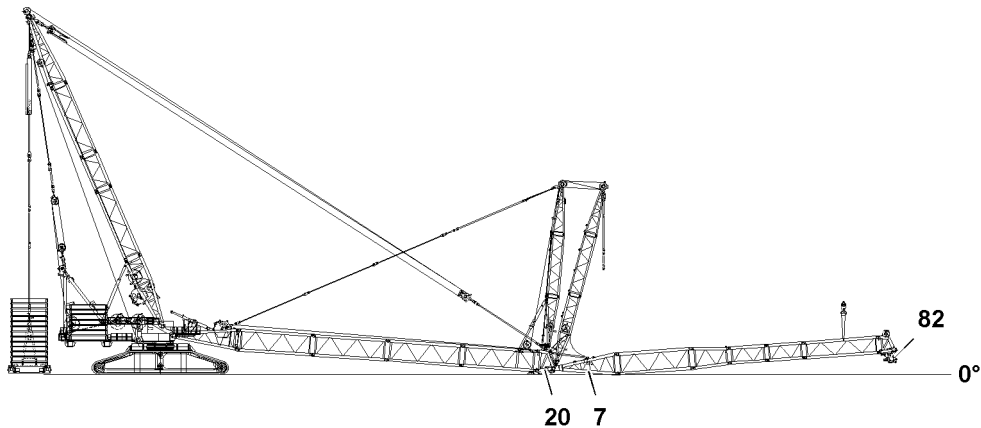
Assembling the roller set — W-lattice jib larger than W- 42 m
